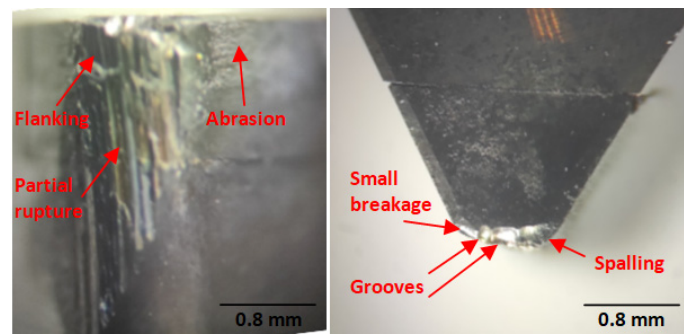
Surface morphology of CBN cutting insert during dry hard-turning of 60CrMoV18-5 cold-work tool steel.
